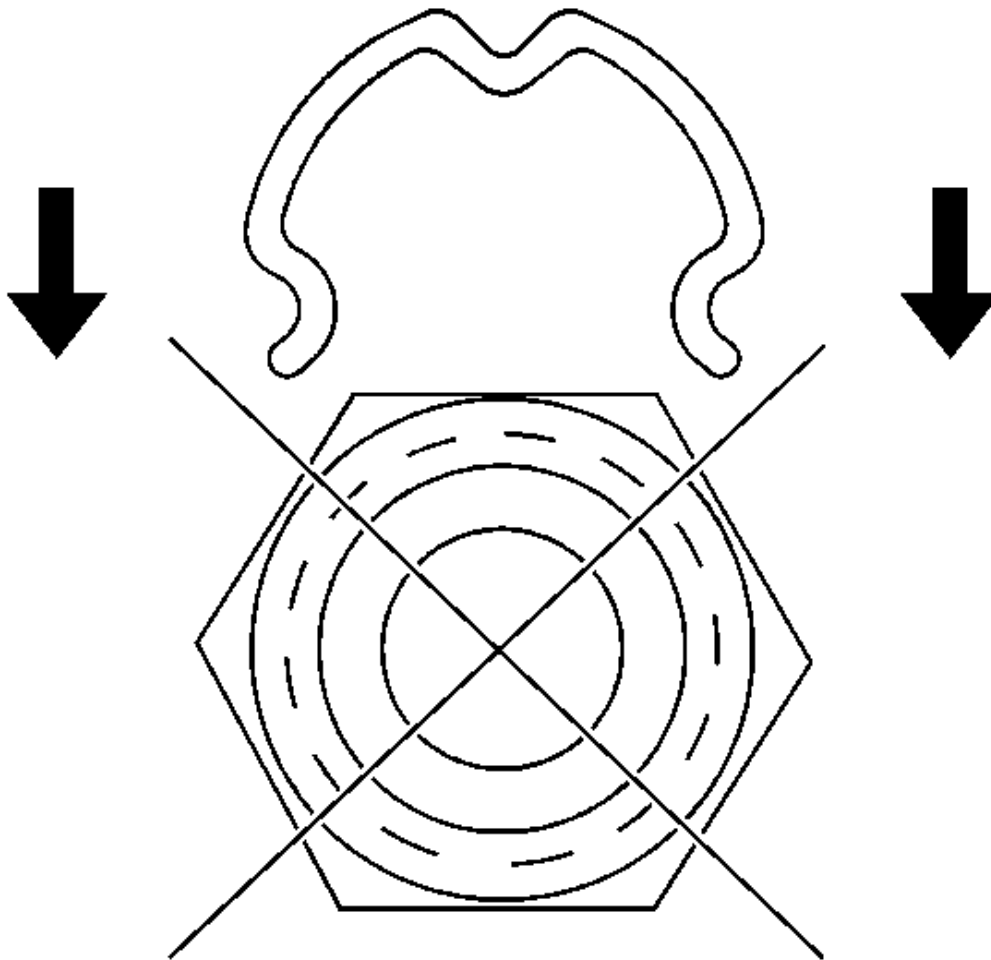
View Of Engine Oil Cooler Line Connections
